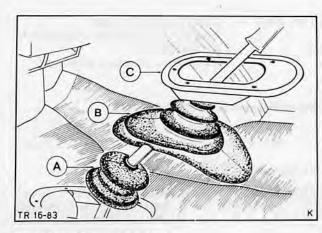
A – Bottom rubber gaiter B – Top rubber gaiter C – Cover plate
